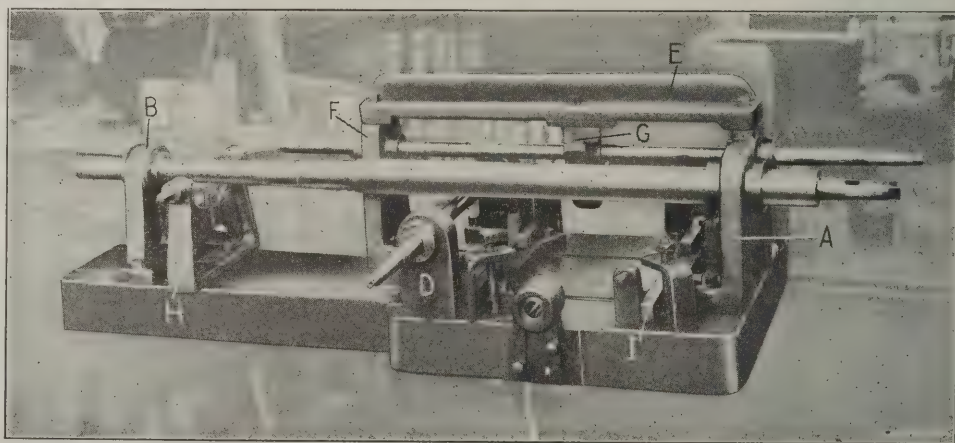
Boring Jig used by Cleveland Machine Tool Works for boring Machine Heads
